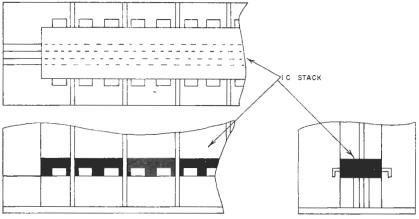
A JIG IS USED to hold the IC's in perfect alignment so they can be glued. It is constructed from thin metal strips.
